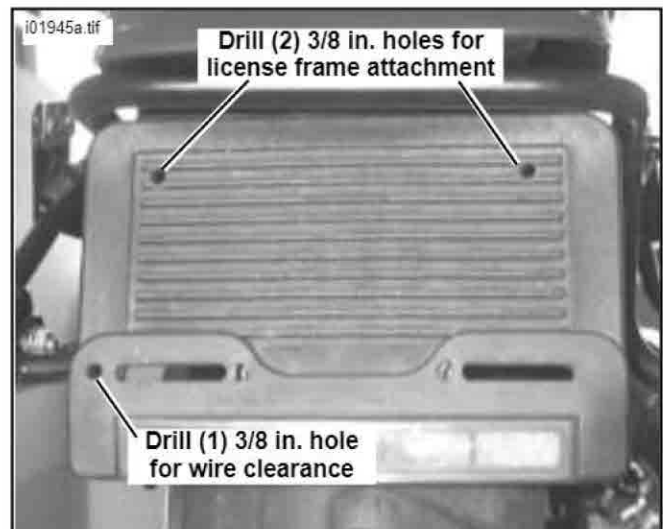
Drill Holes in License Plate Mounting Bracket (FXSTD)
